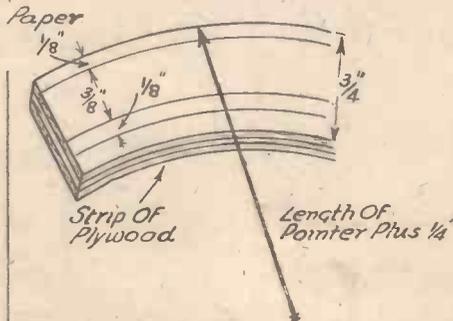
Showing how the paper scale is drawn and mounted on a strip of wood.
